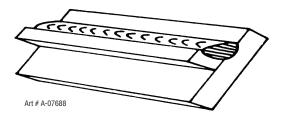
Flat Position, Gravity Fillet Weld
